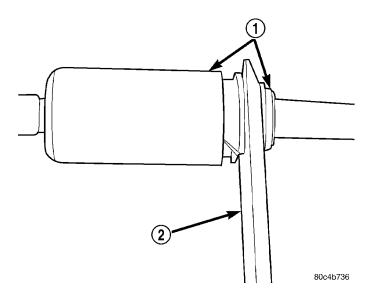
Disconnect Hydraulic Circuit Using Tool 6638A
